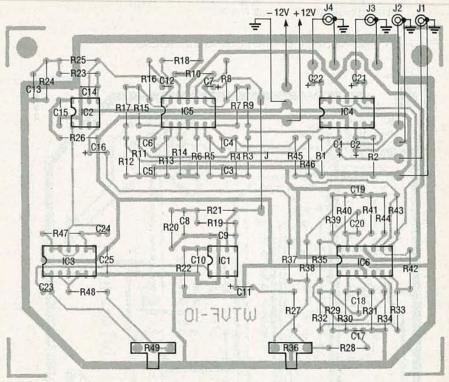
PARTS PLACEMENT DIAGRAM. Remember to connect the jumper lead, use shielded cables for the RCA jacks and twist the supply leads before soldering to the LED and main PC board.
